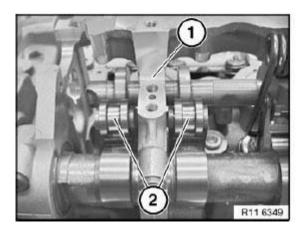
Identifying Contact Surfaces And Intermediate Levers Courtesy of BMW OF NORTH AMERICA, INC.
